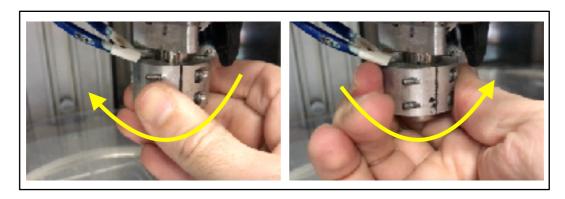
the Extruder Noozle and the cylinder move
